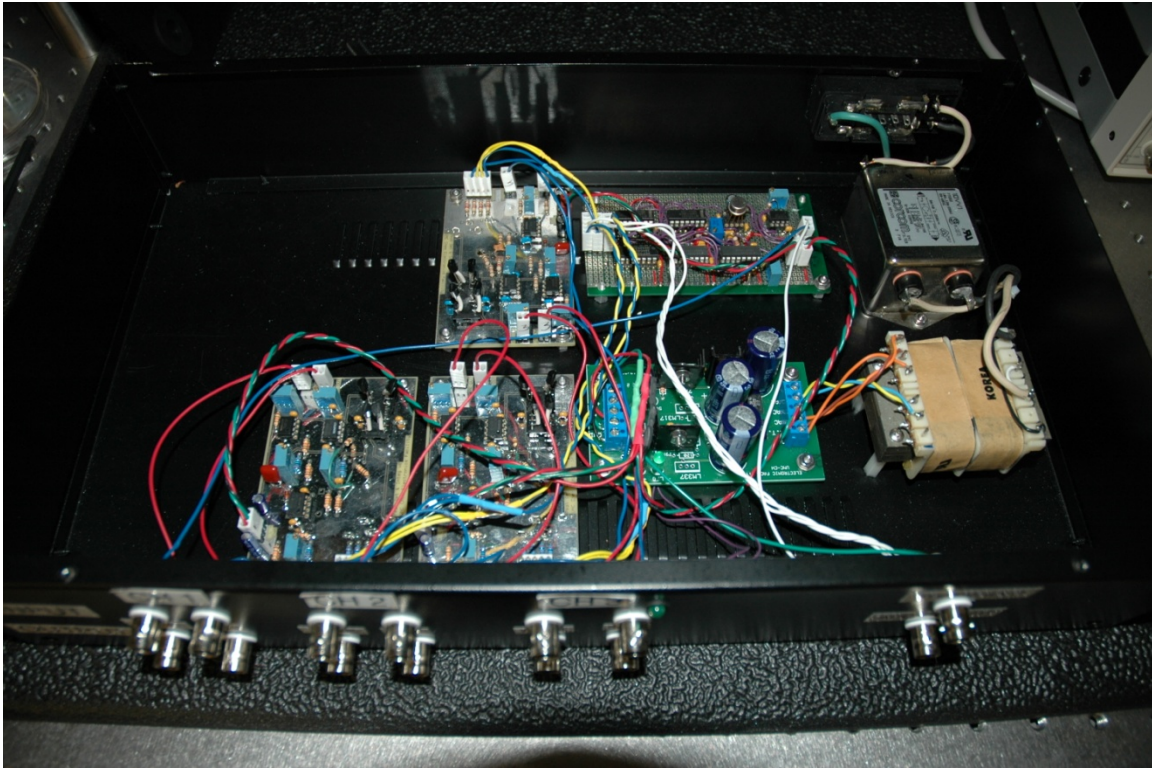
Photograph of the interior of the assembled peak detector and integrator with all boards mounted and a power supply installed.
